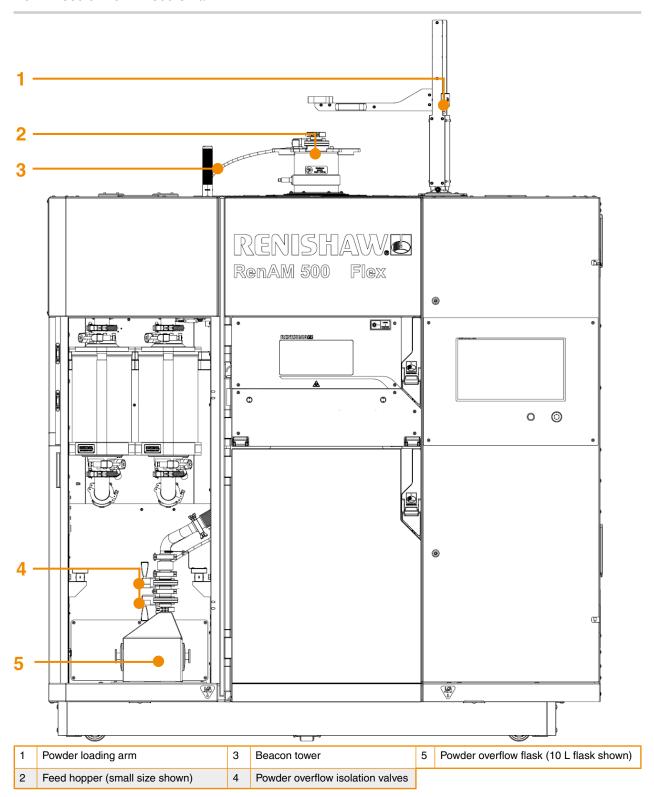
RenAM 500 Flex front view with overflow and large SafeChange filter door open
